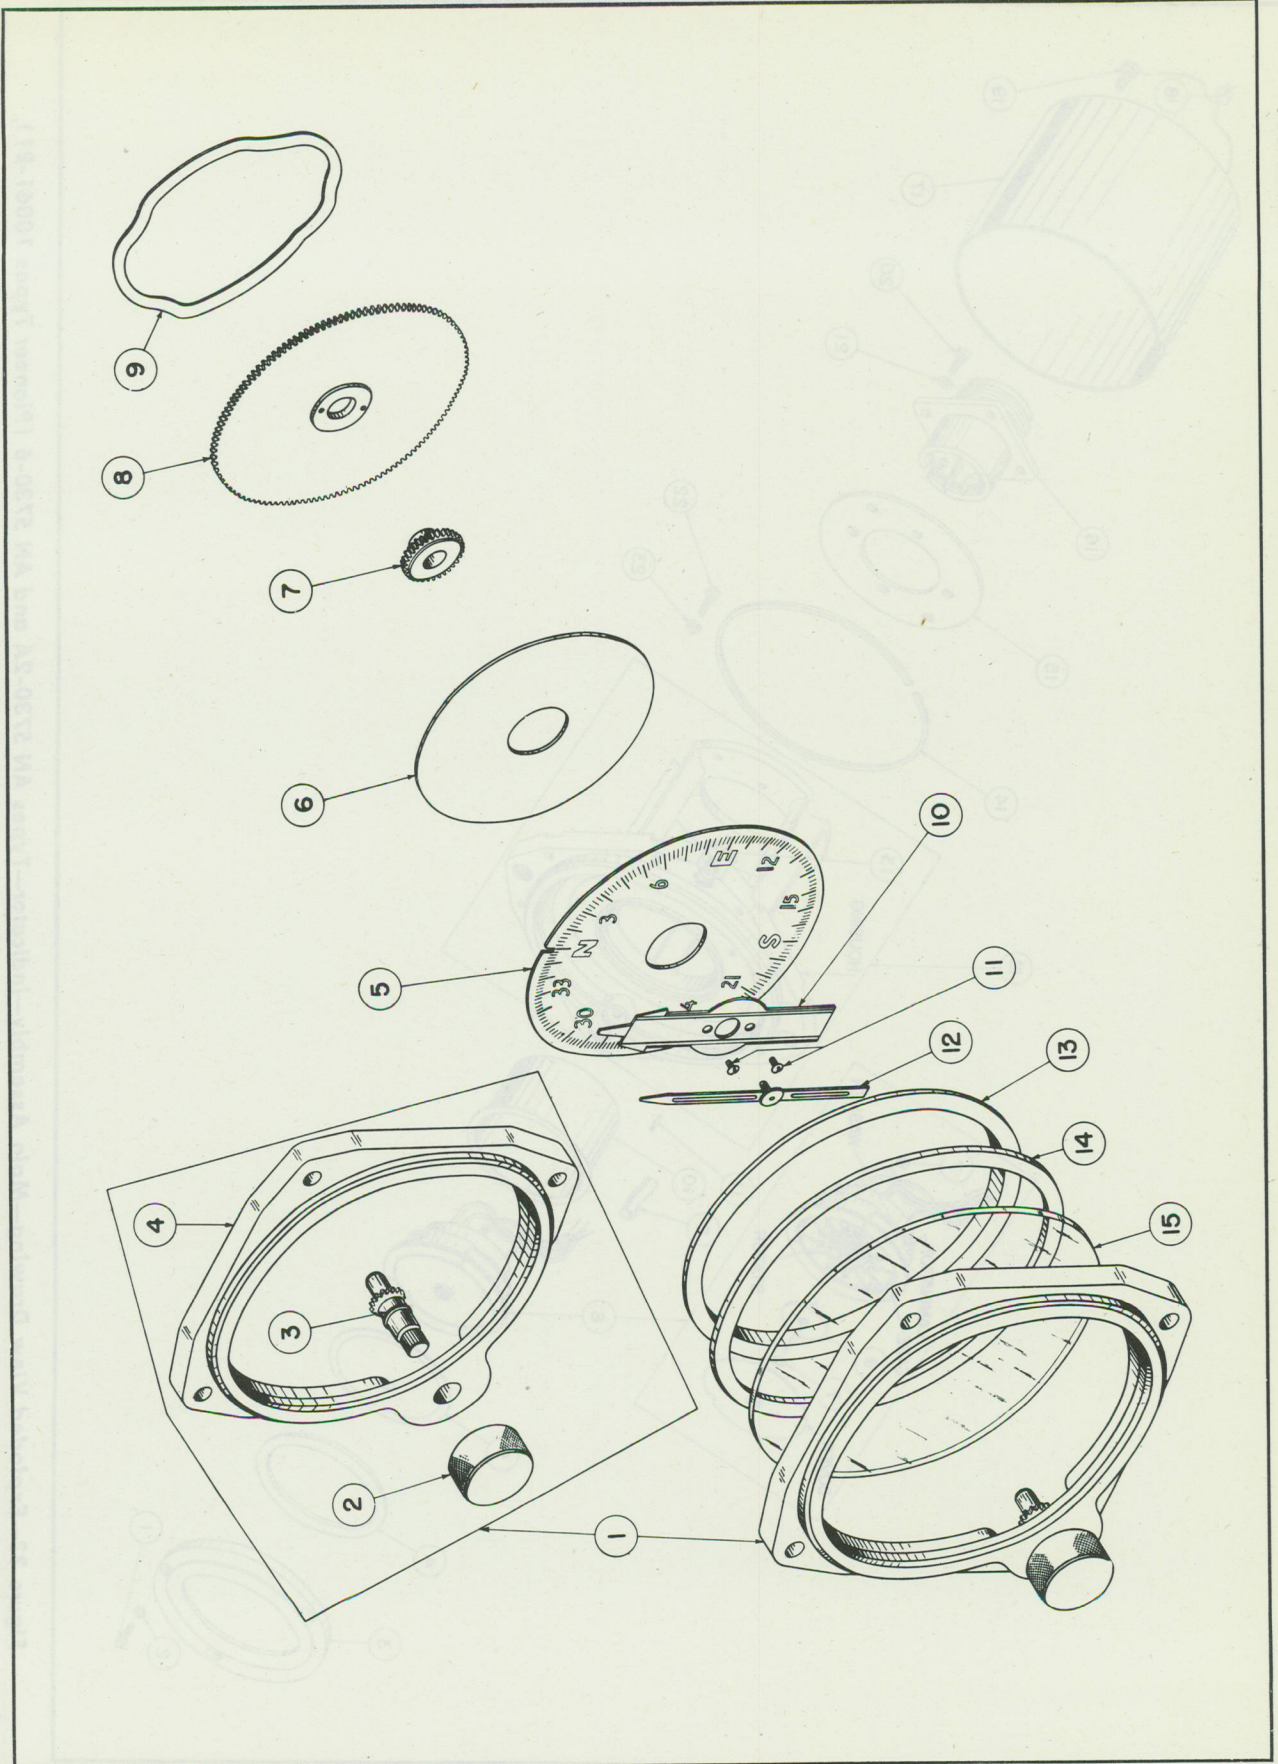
Exploded View Drawing—Main Assembly—Indicator—Types AN 5730-2A and AN 5730-6 (Pioneer Types 10061-B1), and Navy Stock No. R88-I-801-11 (Pioneer Type 10098-1AL-A1)
